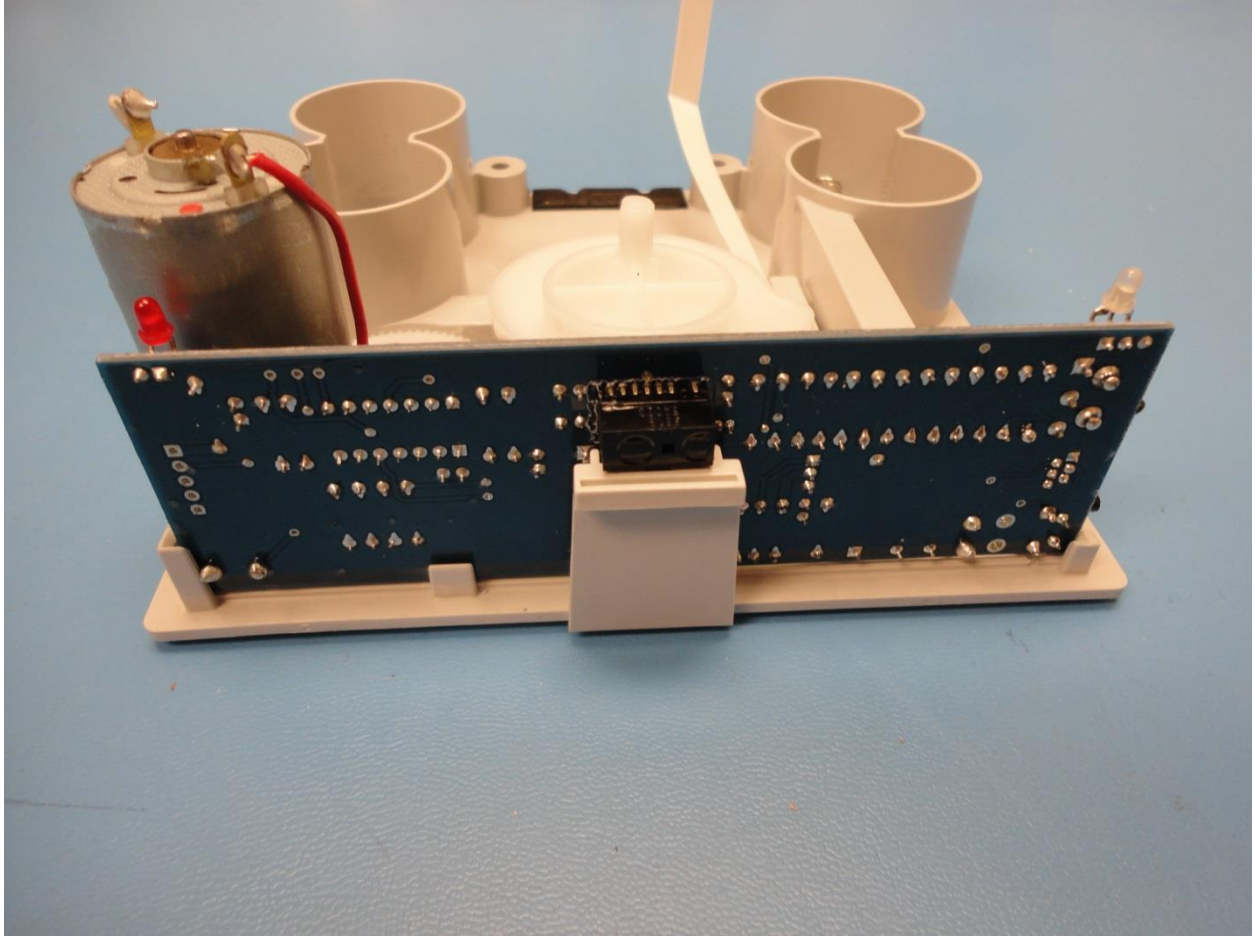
Georgia-Pacific Board Mounted in Dispenser
